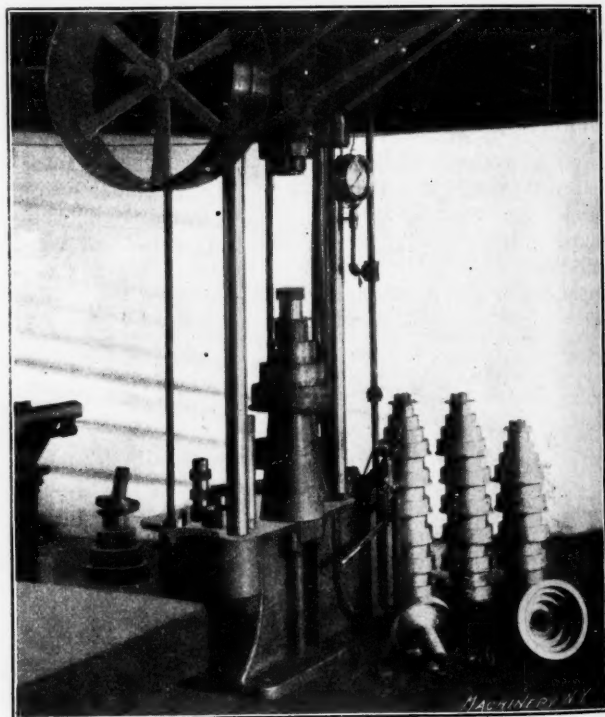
Hydraulic Press for forcing home Cone Pinions, Heads, Face-gears, etc.
